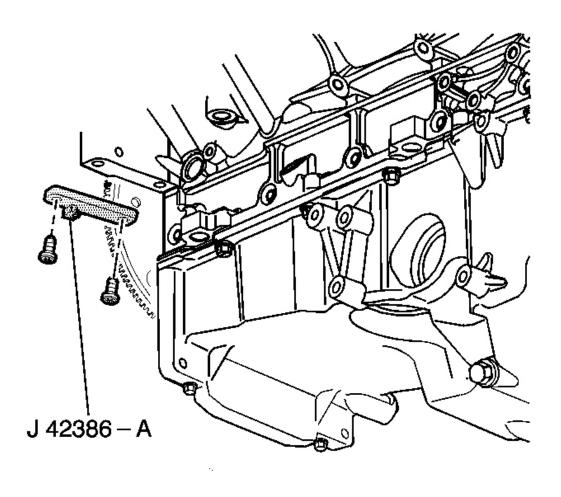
View Of J 42386-A Flywheel Tool Courtesy of GENERAL MOTORS CORP.
